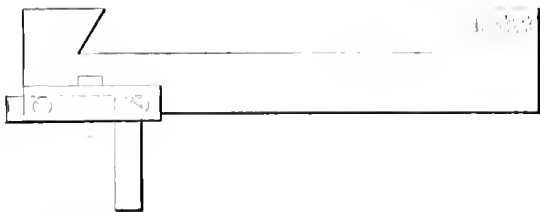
Bracket to be secured to Milling Machine Column when Cutting Cam.
